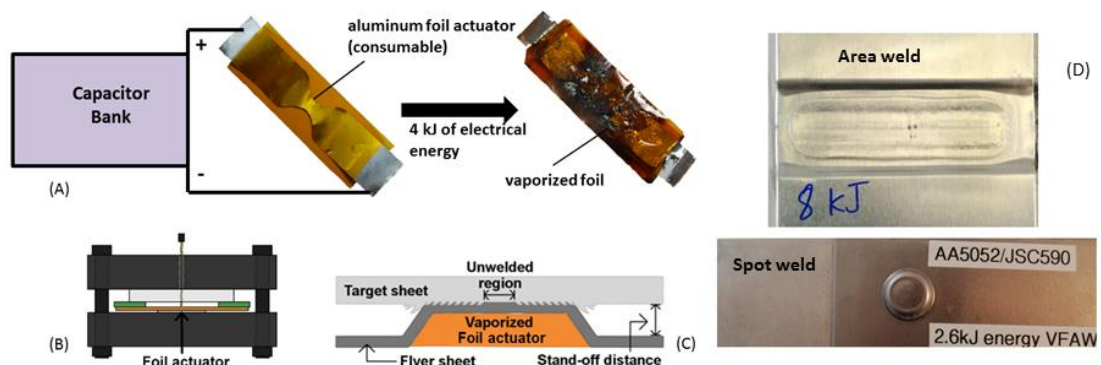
Schematics of VFAW: (A) Foil consumable, before and after being used, (B) typical welding assembly, (C) welding event, and (D) different weld geometries possible with various foil actuator shapes.
